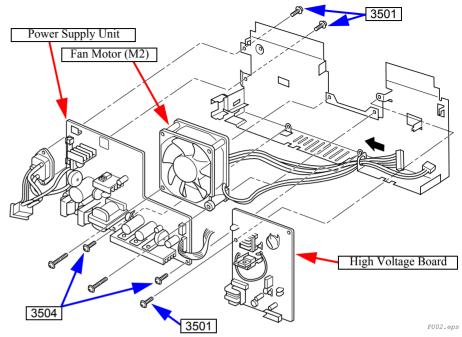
Power Supply Unit and High Voltage Board Removal
